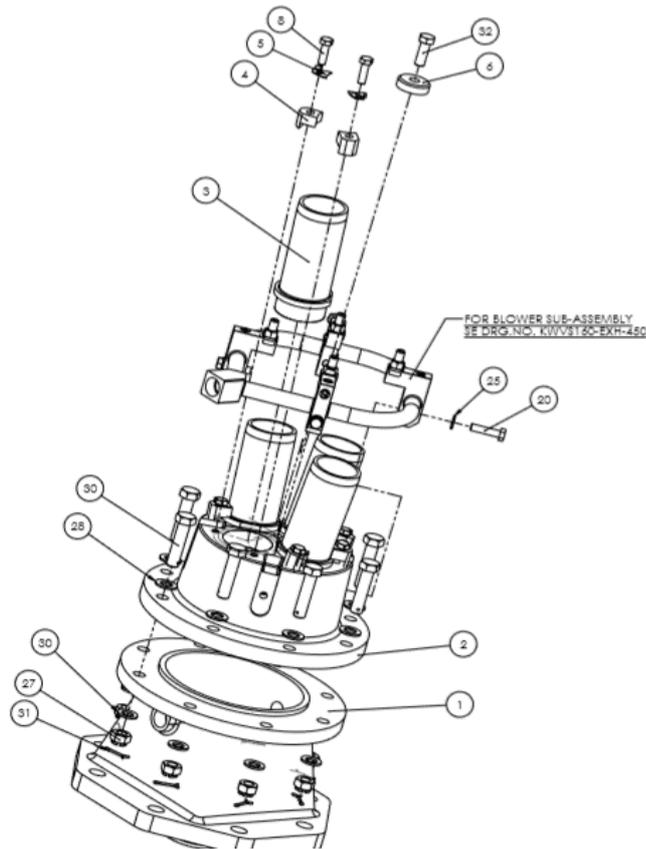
Blast pipe, Blast cap, Nozzles and Blower ring assembly showing all the components necessary for the assembly to be fitted to the locomotive
